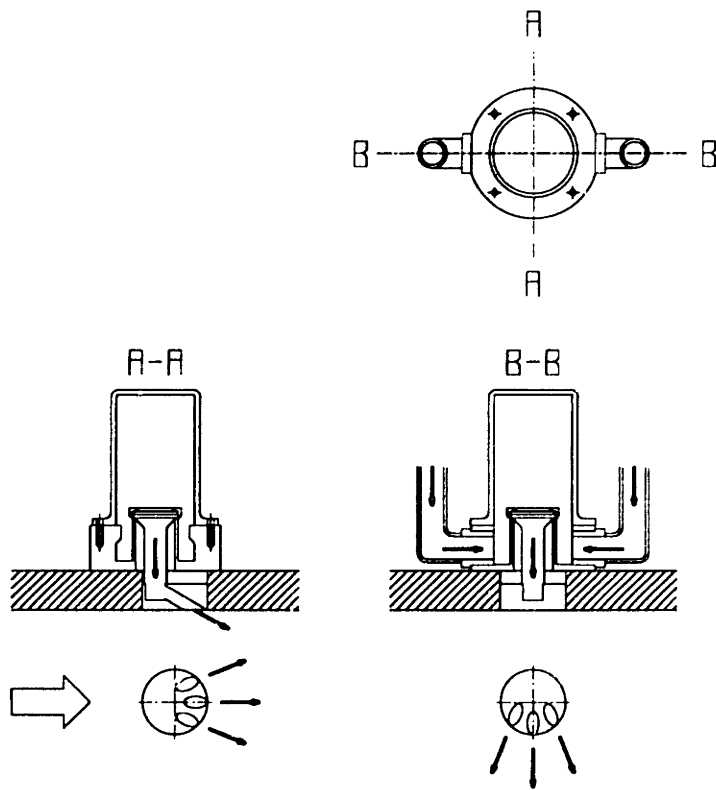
Schematic of actuator, showing valve, injector and injectant flow path.
